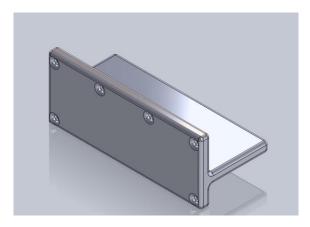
Isometric view of CAD mount (Cited by Pranav Maheshwari)
